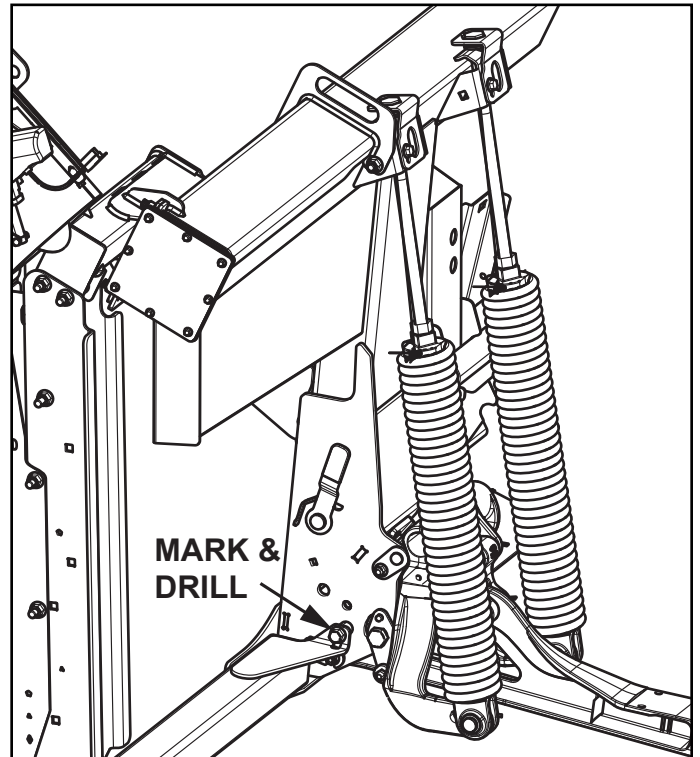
Main mount bracket location, from front right side (Portions of header and Belt drive/fan assembly not shown)
